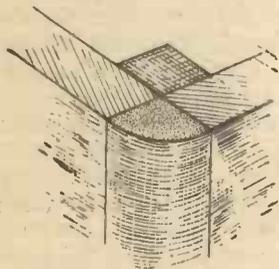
For a modern "streamline" cabinet this type of moulding may be used for the corners.
